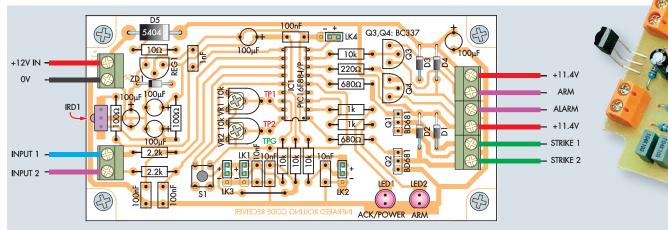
follow this diagram to mount the parts on the receiver board. Use a socket for the PIC microcontroller and take care to ensure that all polarised parts are correctly orientated. The infrared receiver module (IRD1) can either be mounted on the board (as in the prototype) or connected via shielded cable (see diagram next month).
